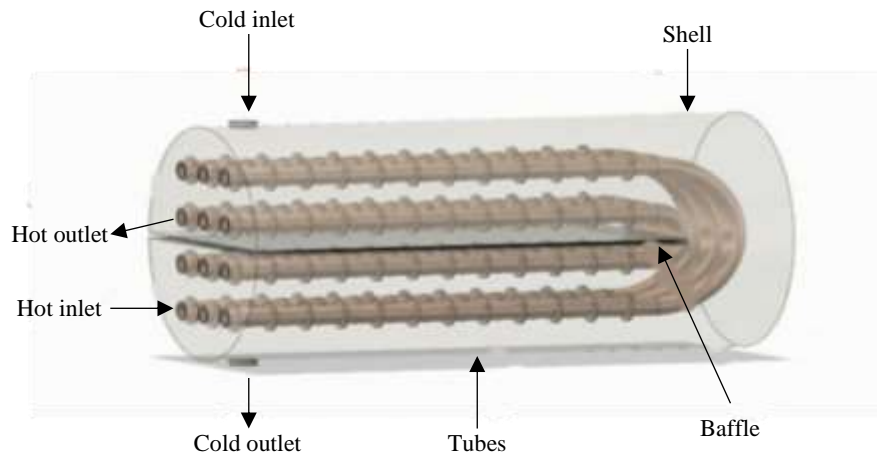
CAD model of U-tube and shell tube heat exchanger with fins.
